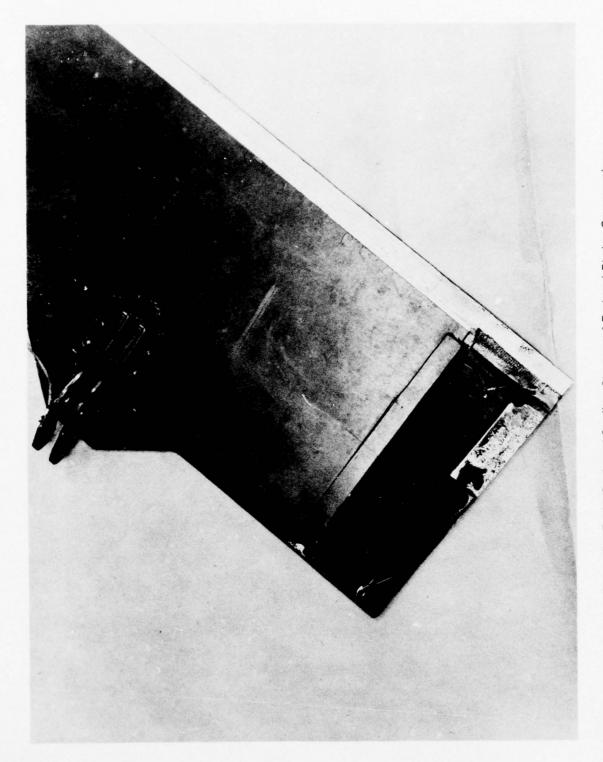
F-111 Outboard Spoiler, Closeup of End and Fitting Construction
